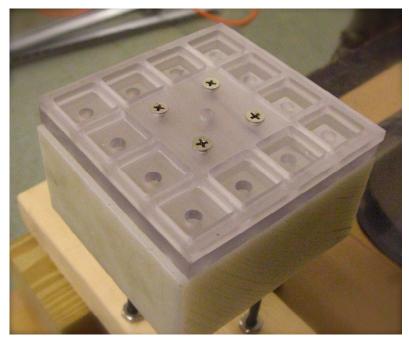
Photograph of test fixture holding 12 test specimens. The hole in the plate center contains pressure sensor #3.
